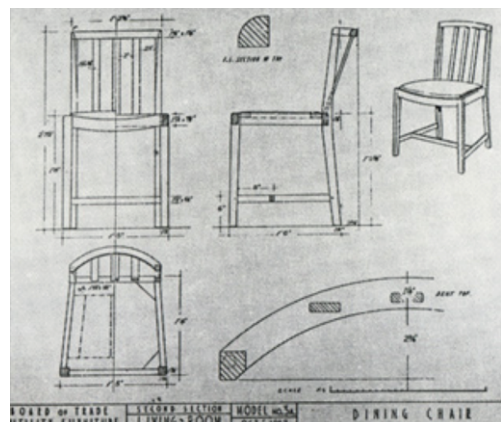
Government approved technical drawing detailing materials permitted, parts permitted and the appearance of the finished product.
